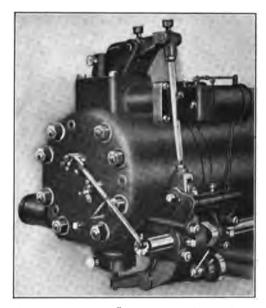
Valve Gear of Ingeco Gas-engine.
